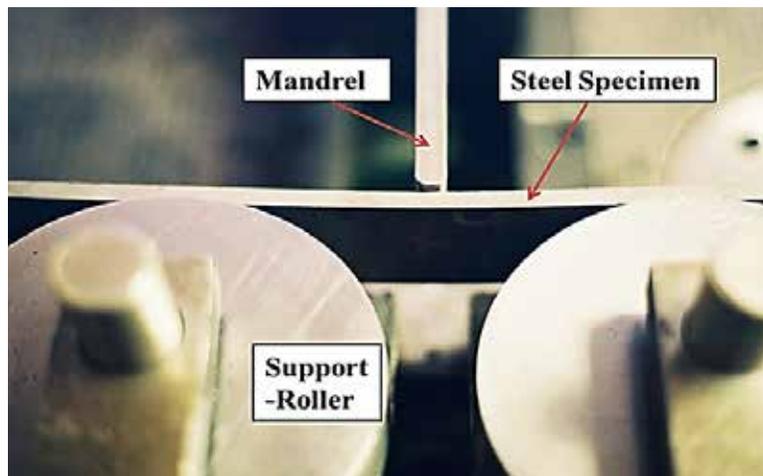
Configuration of the guided-bend test in accord with Figure 3 of ASTM E290. Clearances per side are 0.0625"; support rollers and mandrel were lubricated with WD-40.
